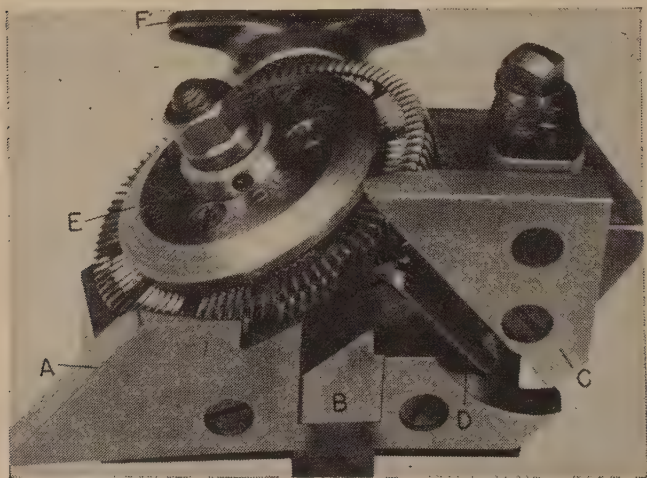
Inside view of cam ring section from 24-inch, 32-feed S. S. W. machine showing design wheel, tuck bar and pull-down cam.
